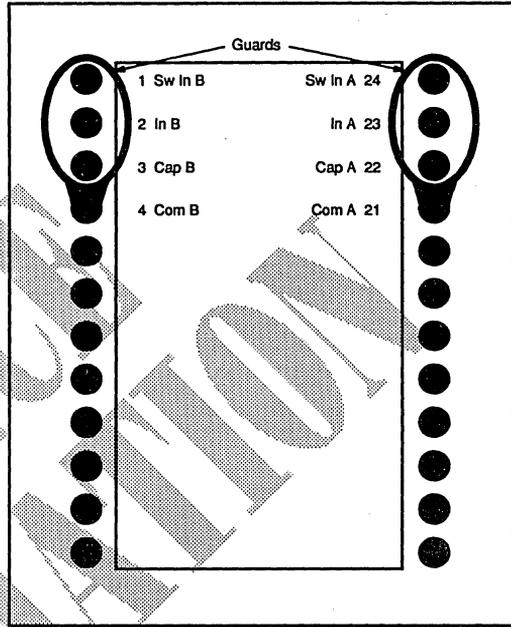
PC Board Layout Showing "Guard" Traces for Input. Both top and bottom of board should be guarded.
